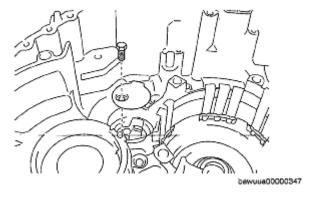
Identifying Seal Rings Courtesy of MAZDA MOTORS CORP.
